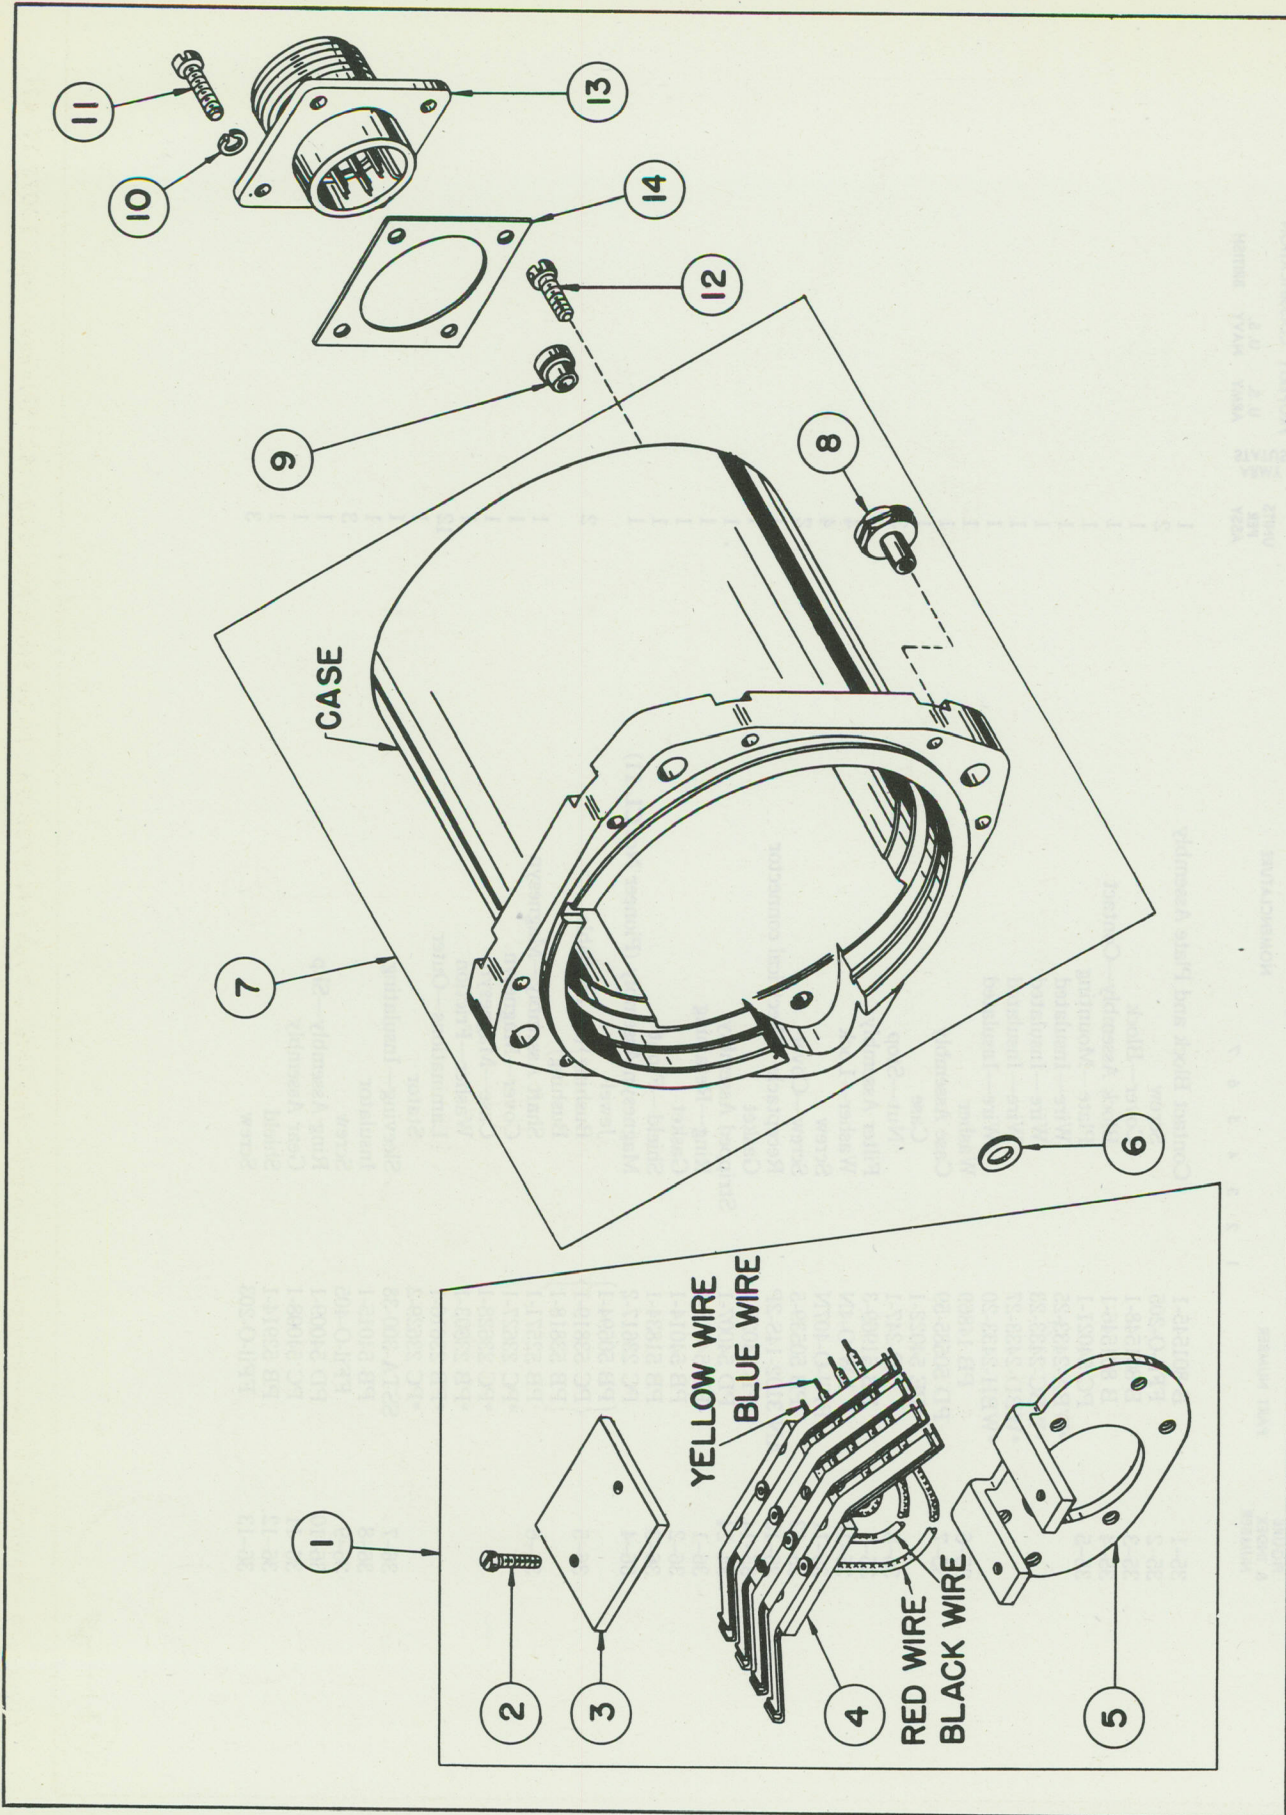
Exploded View—Case and Contact Assembly—Indicator—Type AN 5730-2A, Navy Stock No. R88-I-803 (Pioneer Type 10078-IT-A1)
